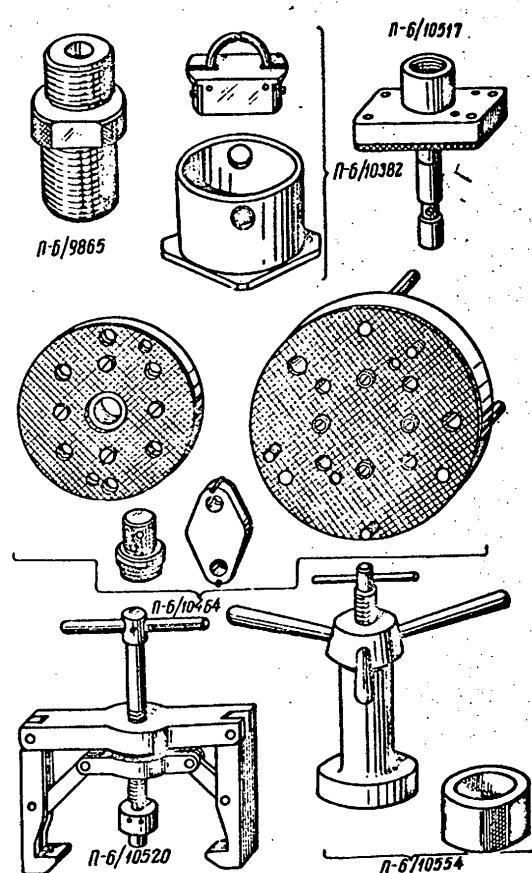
DEVICES FOR ASSEMBLY OF CRANKCASE NOSE-PIECE AND CLUTCH
